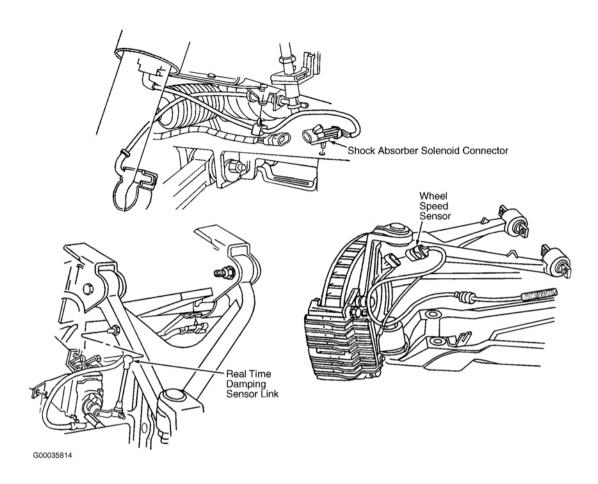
Identifying Rear Suspension Electronic Connectors Courtesy of GENERAL MOTORS CORP.
